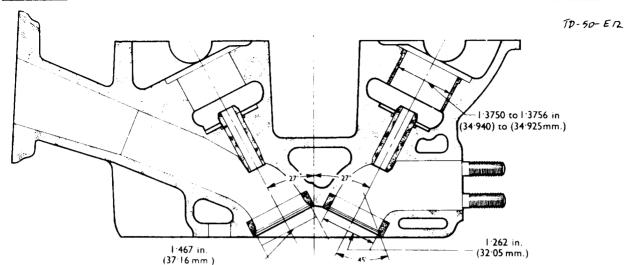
VALVE SEAT INSERTS, VALVE GUIDES & CAM FOLLOWER SLEEVE.
